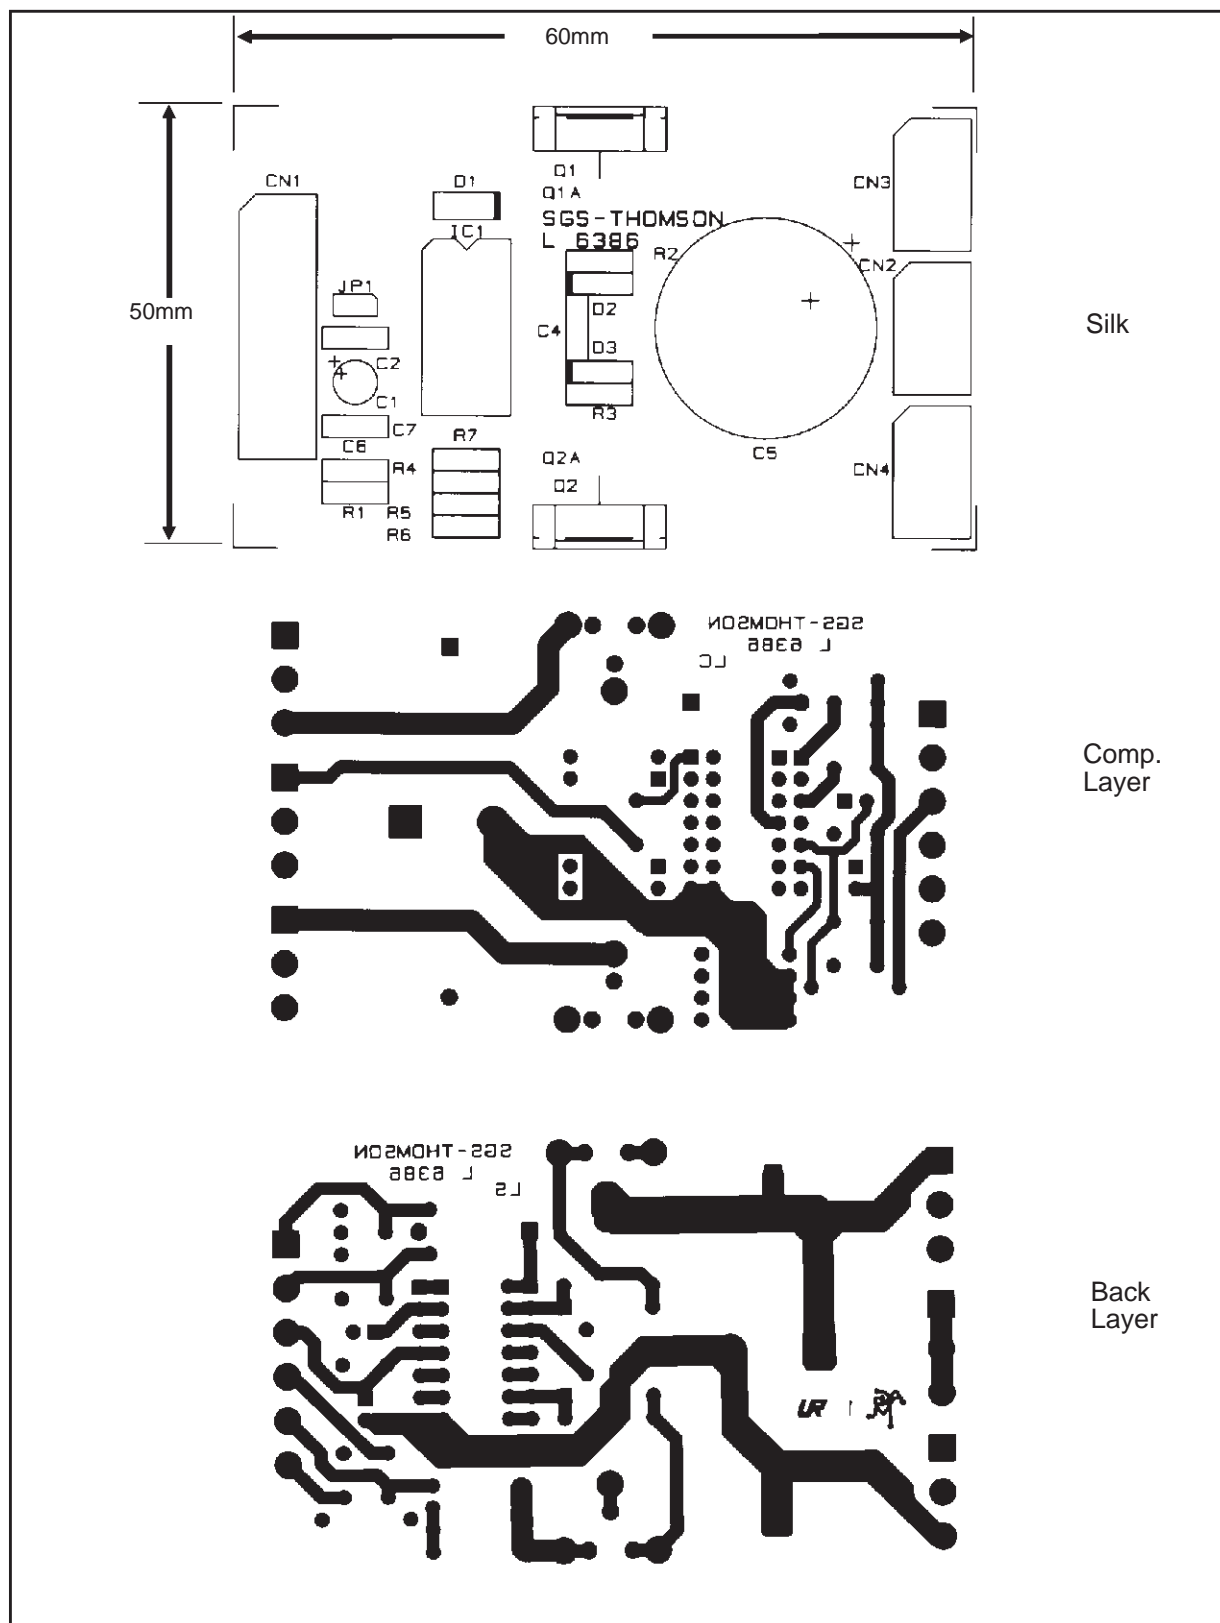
L6386 - PCB and component layout of the fig. 6.
